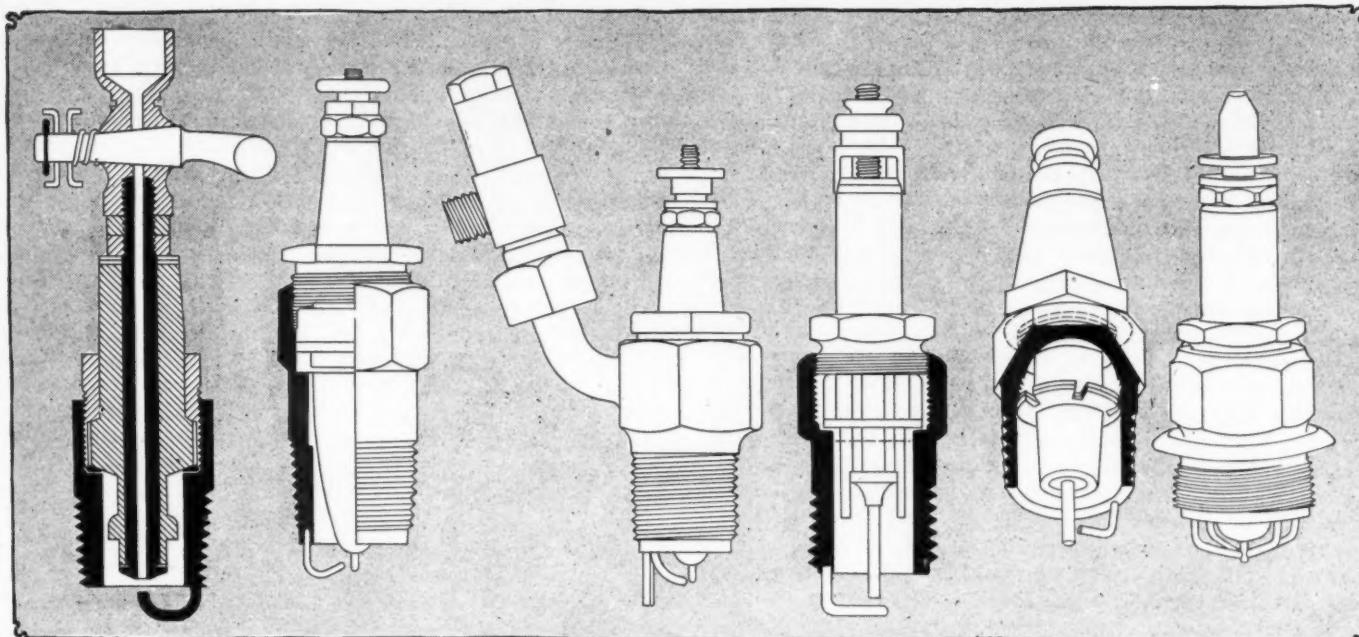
Heco priming. Fig. 2—AC Ford plug. Fig. 3—AC priming type. Fig. 4—MacKee Blitz plug. Fig. 5—Wright. Fig. 6—V-Ray
